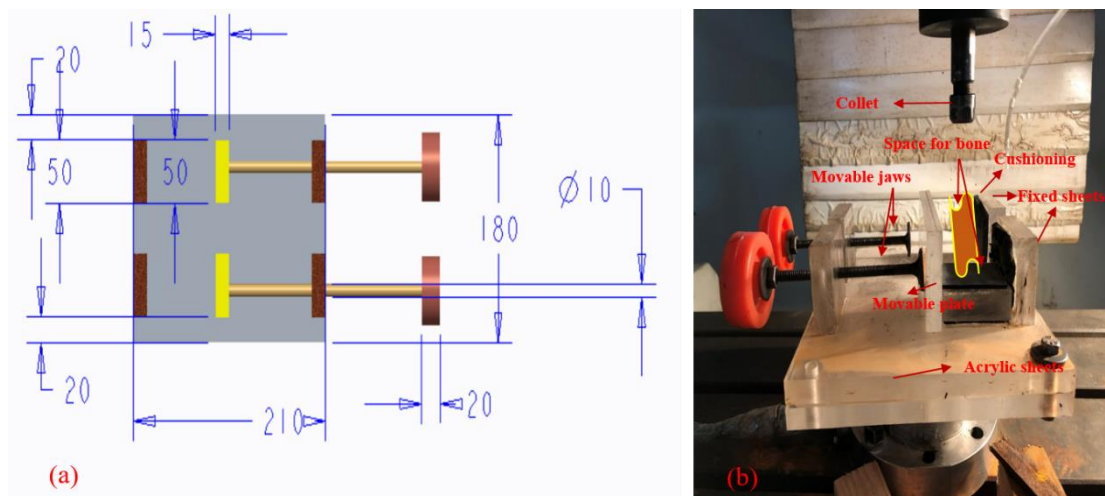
(a) 2D schematics of fixture, (b) fabricated fixture with cushioning to hold bone specimen
